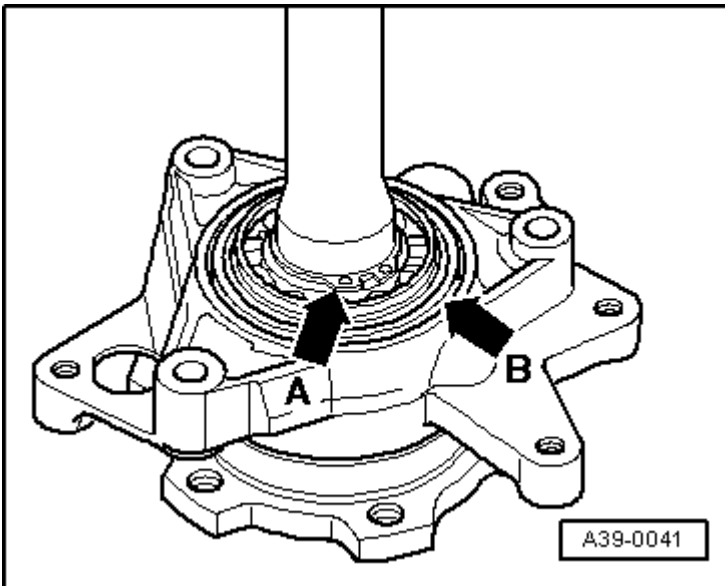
Removing/Installing Circlip And Seal At Grooved Ball Bearing
